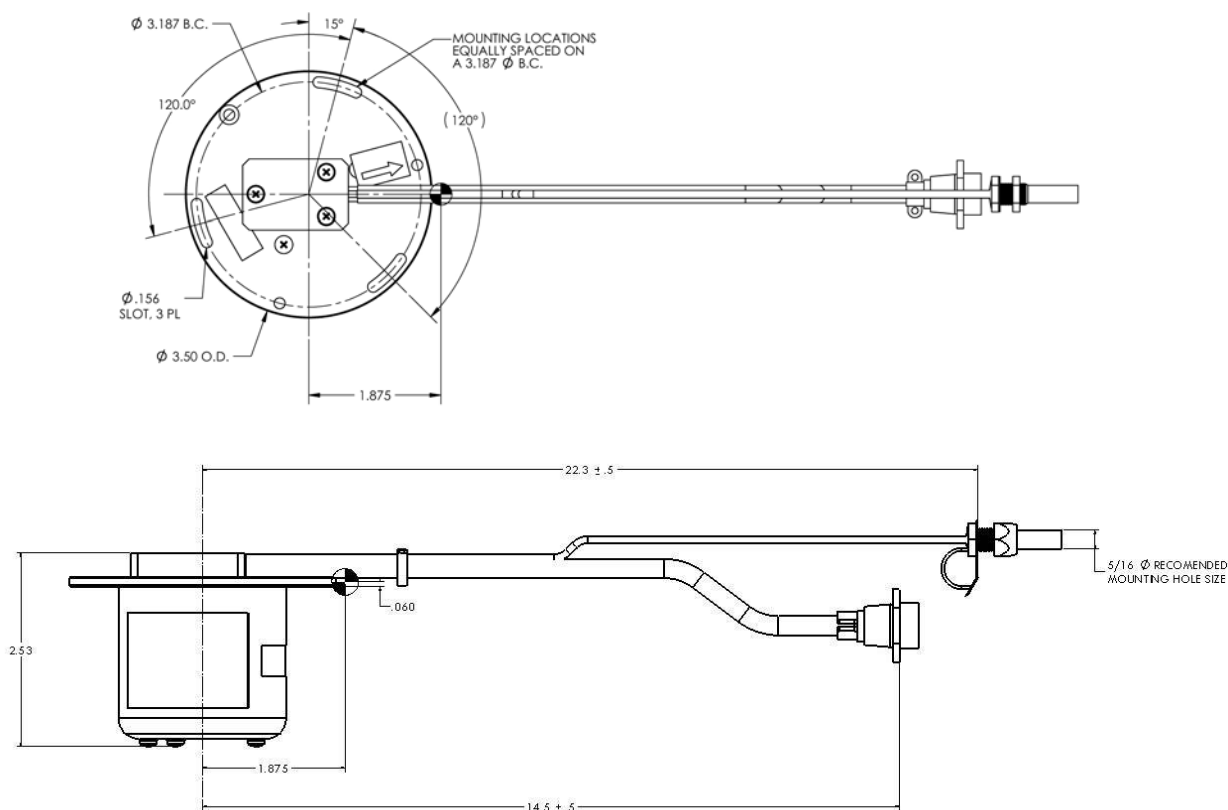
Magnetometer/OAT Sensor Outline Dimensions
